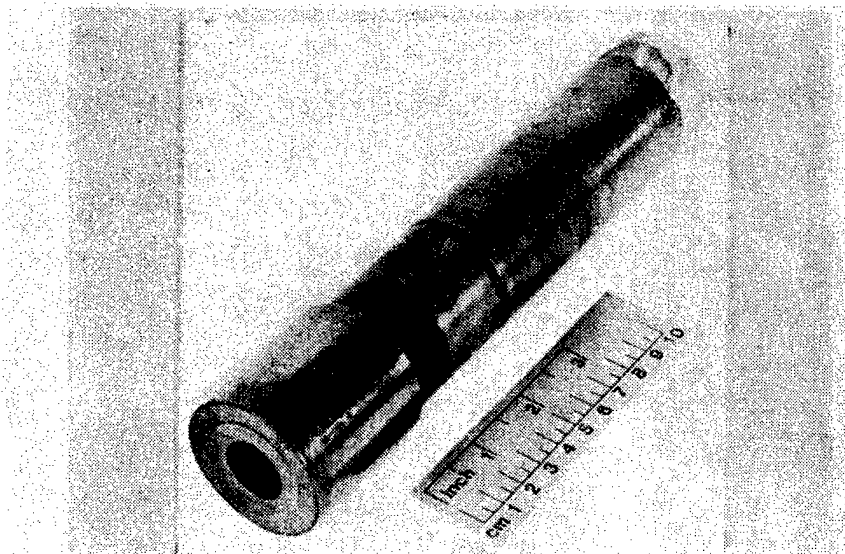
BARREL ASSEMBLY WITH BOROSILICATE/GRAPHITE
